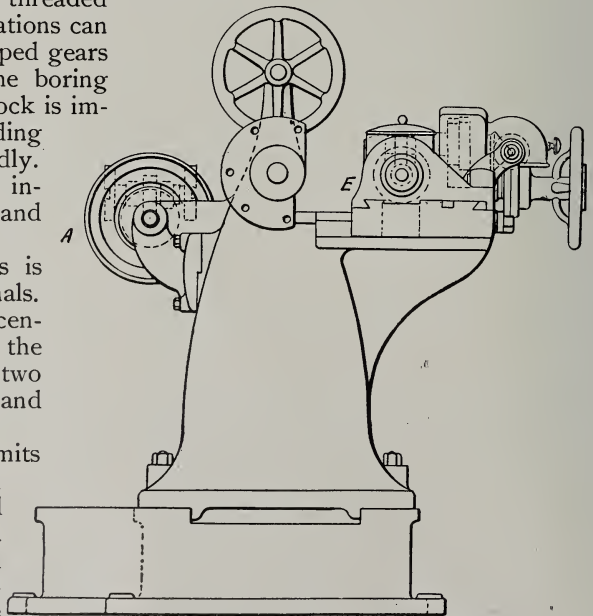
END VIEW OF THE RIGHT-HAND HEADSTOCK
